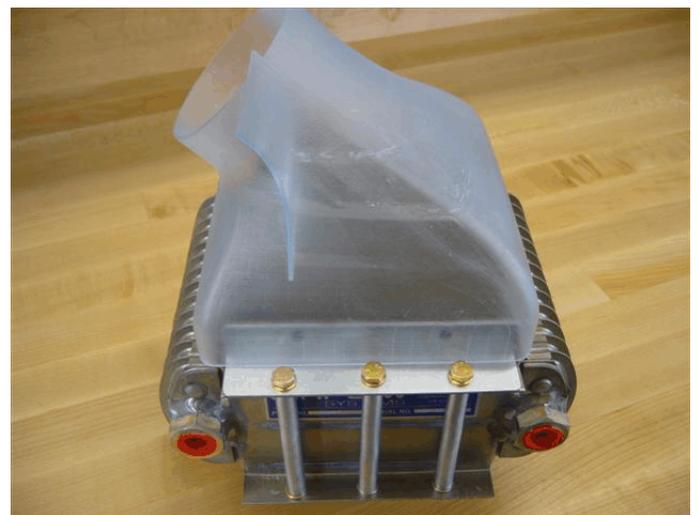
Duct positioned over brackets for trial fit. Make sure both bracket flanges are inside the duct. Clear duct used for illustration.
